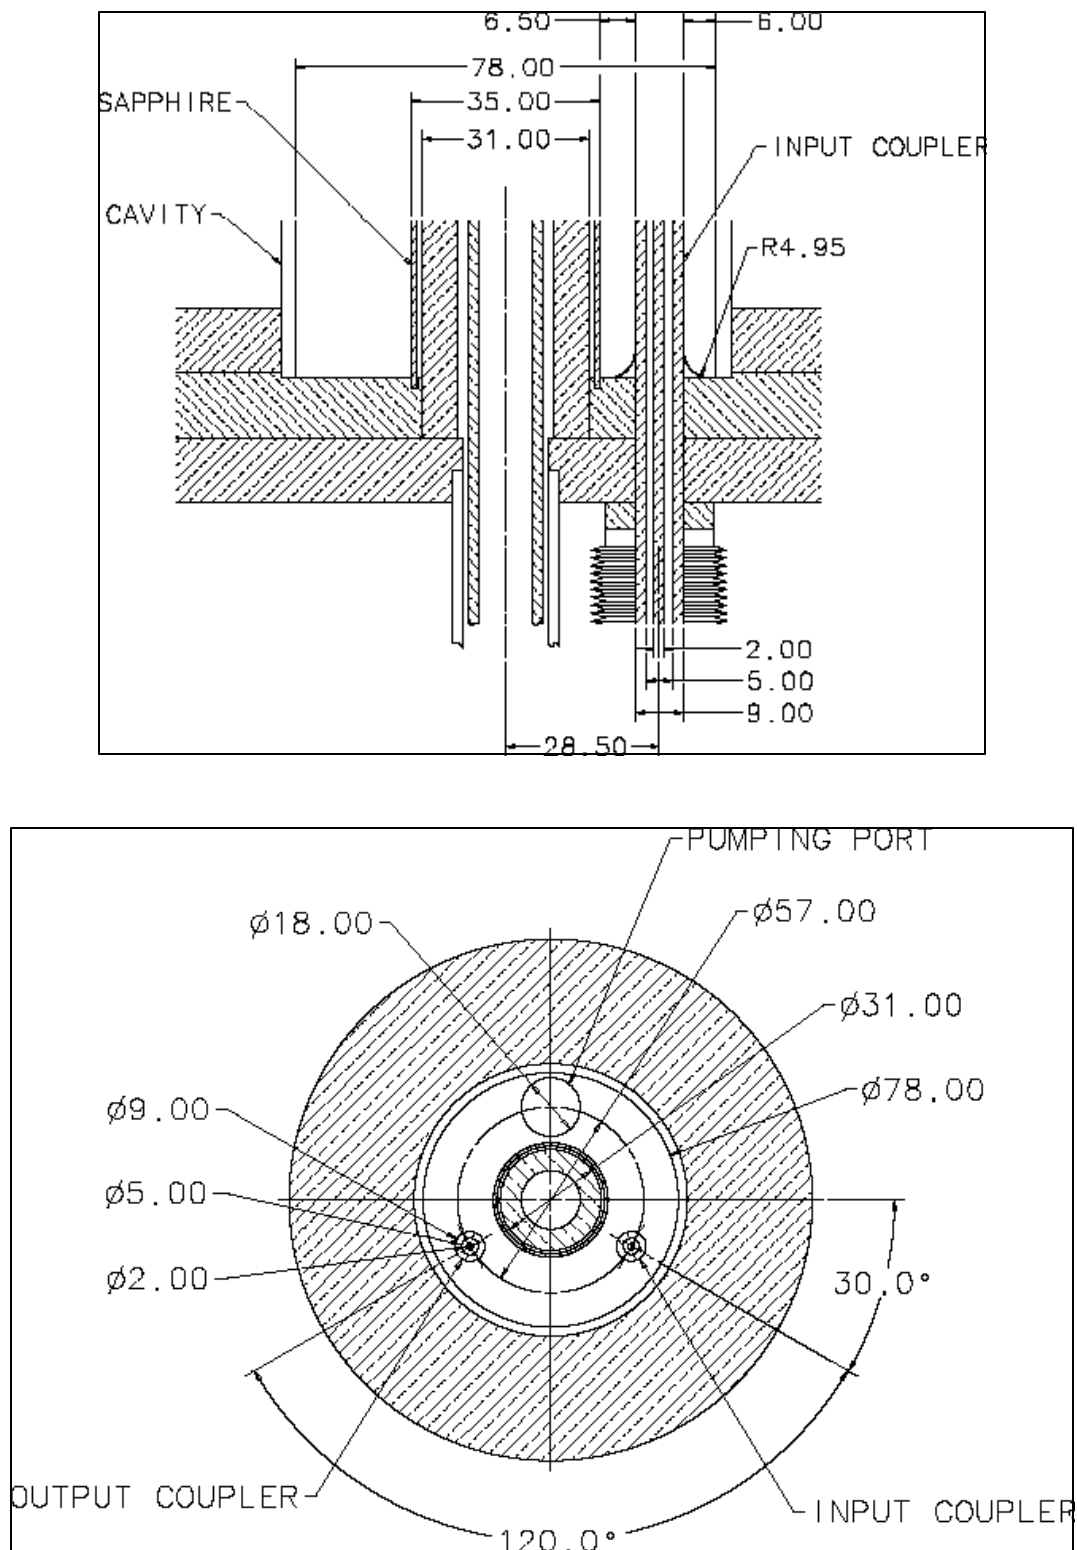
Host cavity assembly including sapphire bore, sample-holder, adaptor flanges, cryostat top and bottom flanges and input/output couplers. Zoom into bottom section (all measures in mm).
